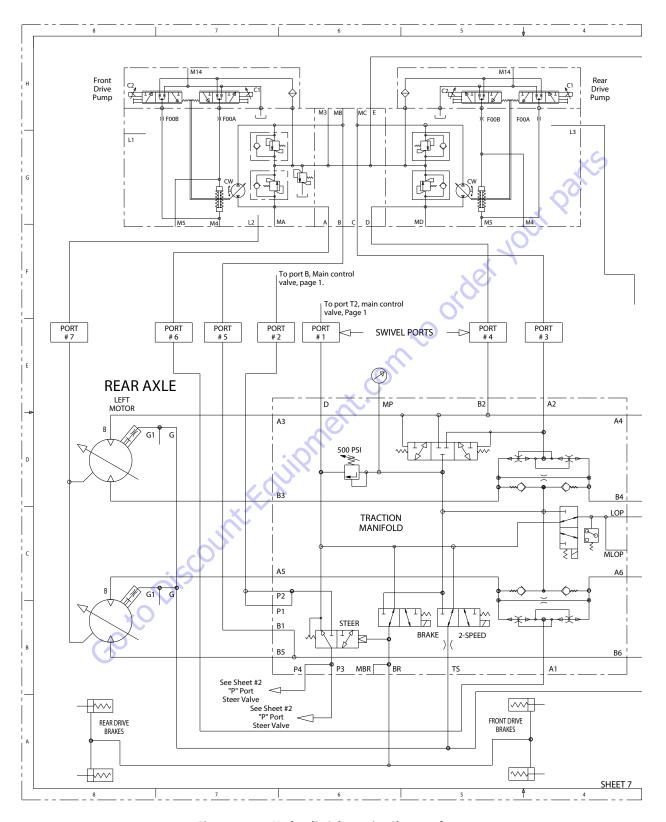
Hydraulic Schematic - Sheet 7 of 10
